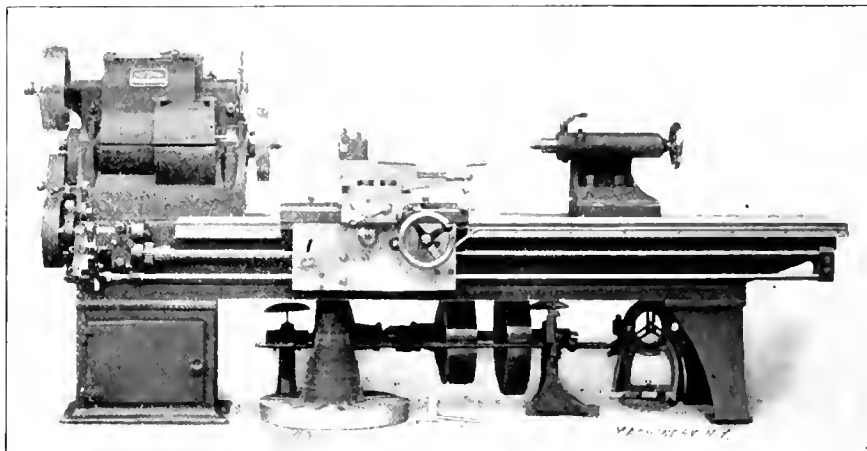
Geared head Lathe built by Kopings Mekaniska Verkstad, Koping, Sweden.
